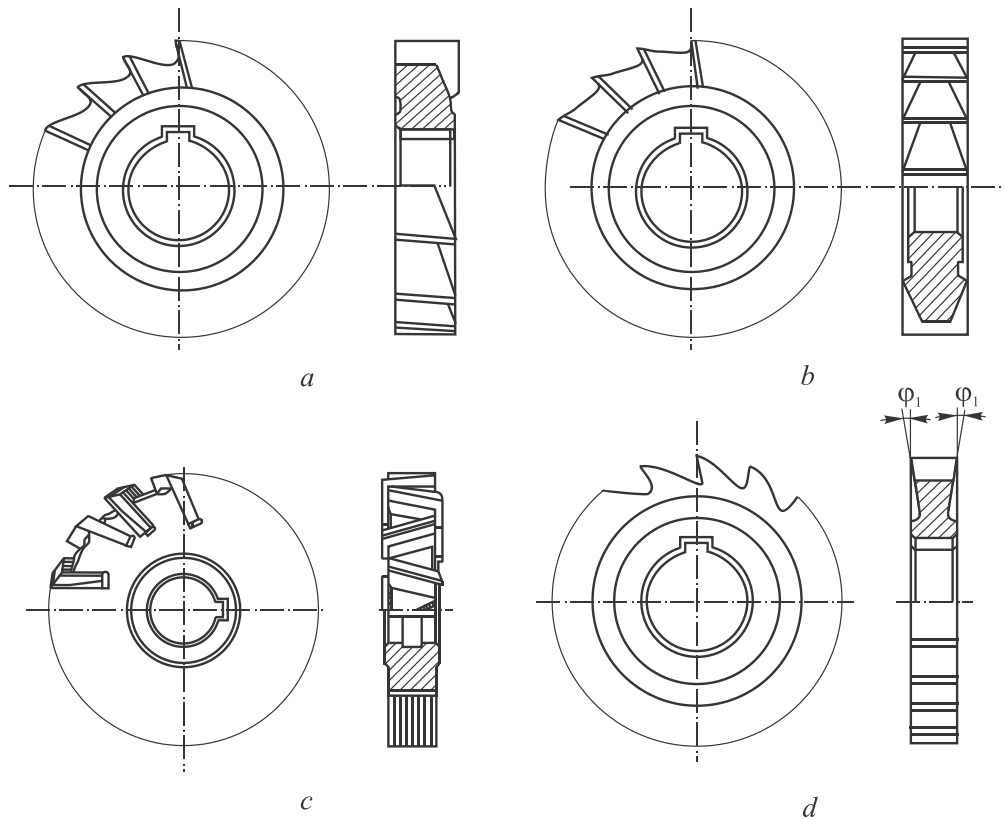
Side milling cutters: (a) half-side cutter; (b) side cutter; (c) side cutter with staggered inserts; (d) slotting cutter
